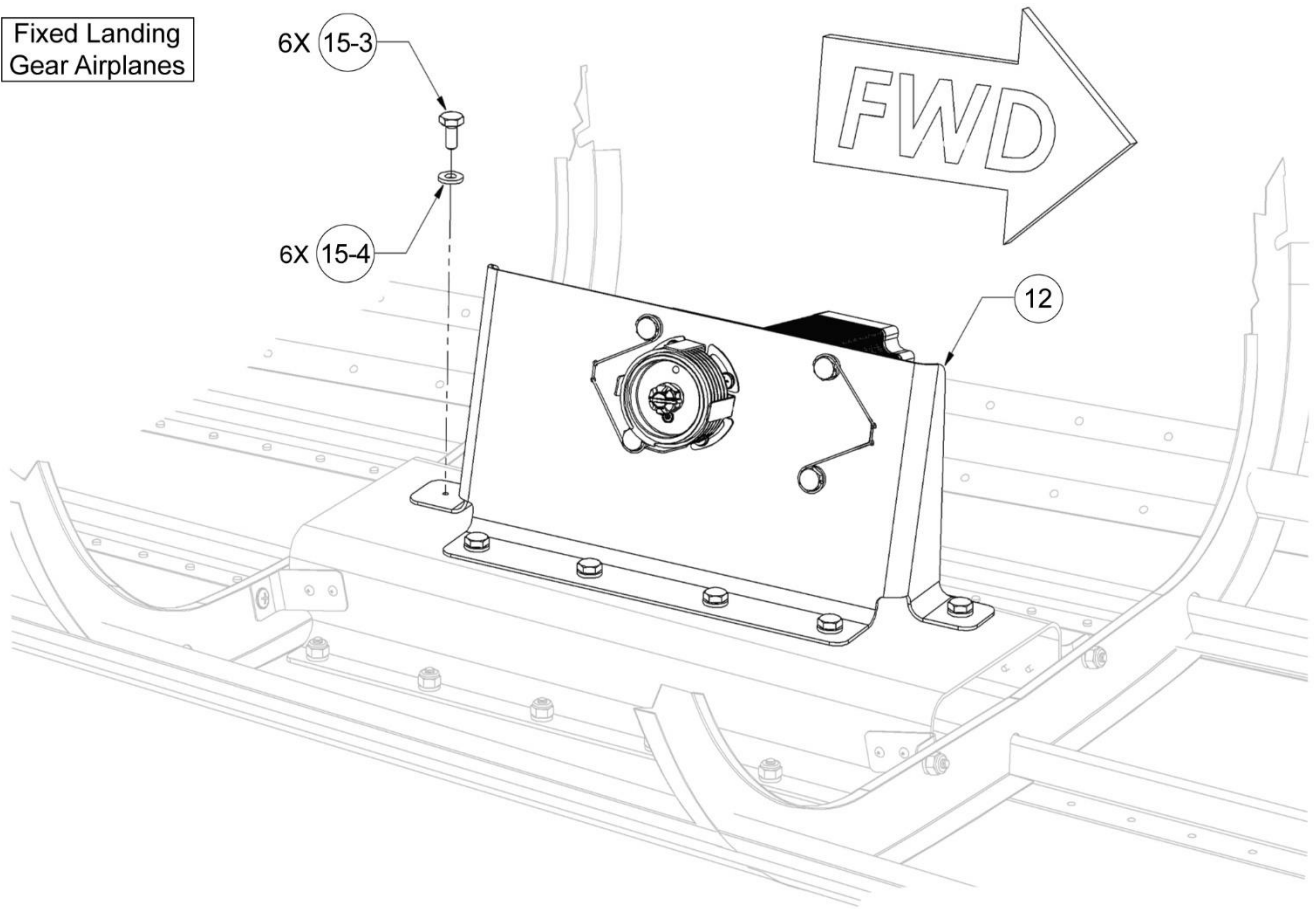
Attaching Pitch Servo Riser Bracket Assembly to Base Bracket
